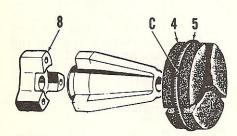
Special tool is available for sliding clutch shoes (4) and garter spring (5) onto driver (8). Connection of garter spring ends (C) should be at middle of clutch shoe.
